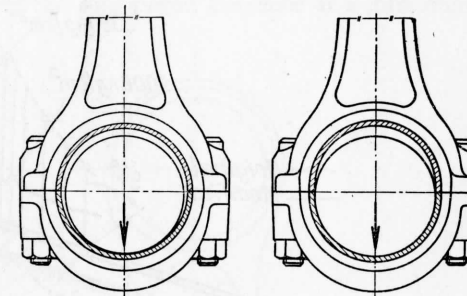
Distortion of the connecting rod due to the accelerating forces of the piston. The left hand picture illustrates the shape of the connecting rod at low speed, the right hand one shows the deformation of the big end bearing due to large accelerating forces at high speeds.
